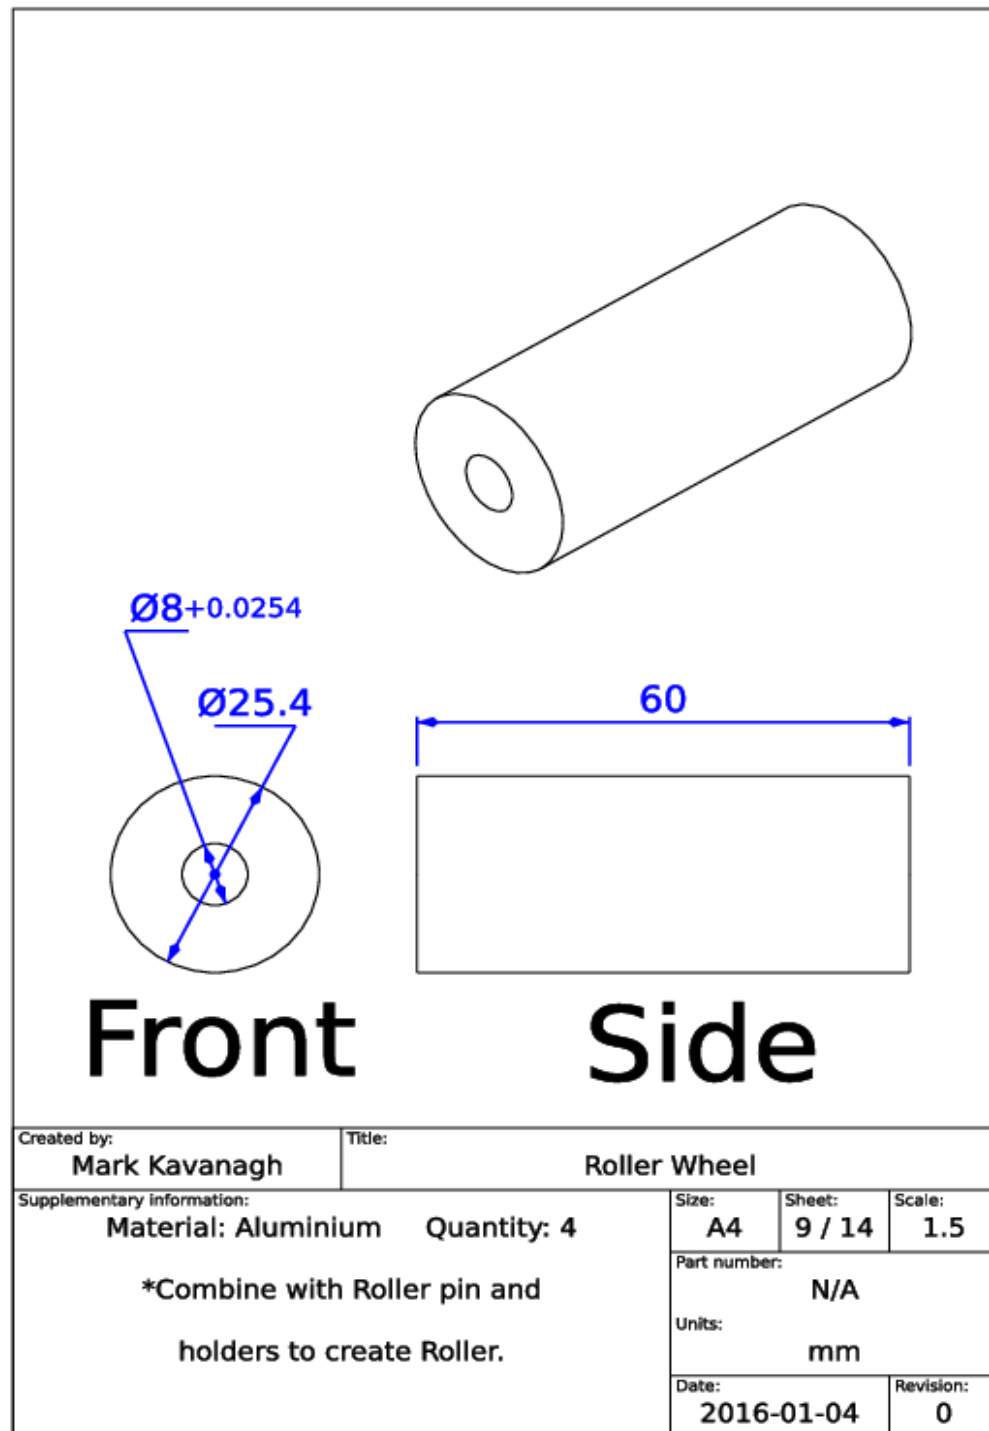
Specifications for the hollowed cylinder part of the rollers.
